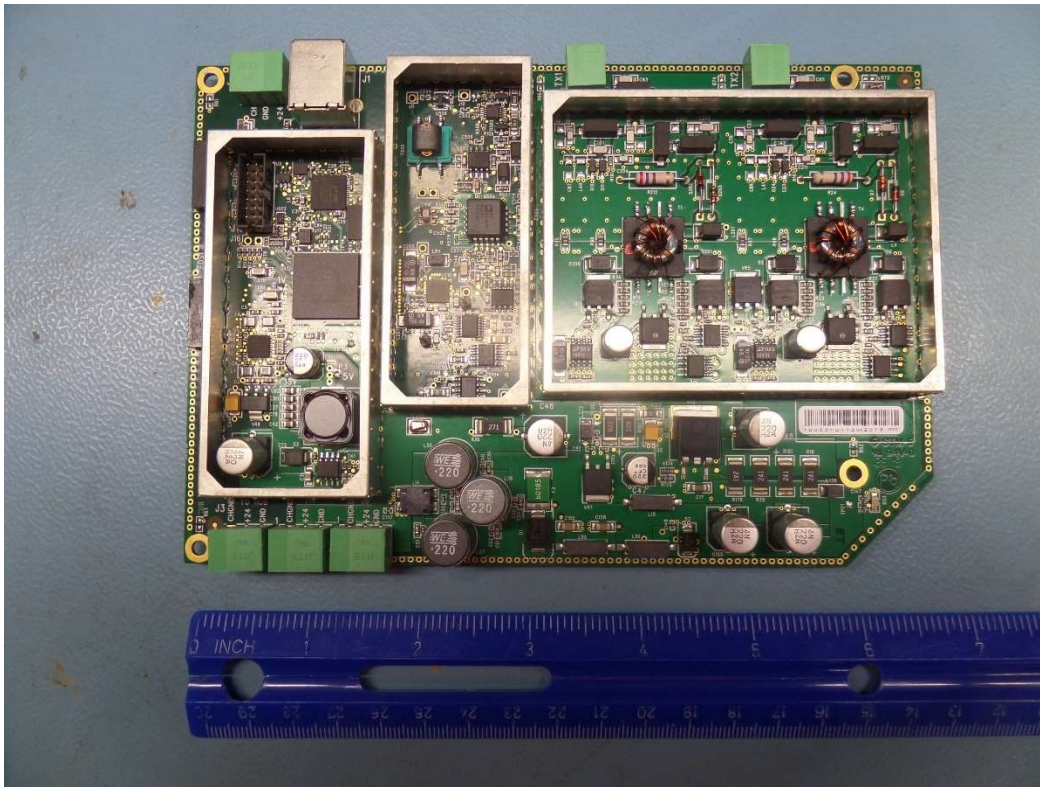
Neo Remote Electronics Enclosure TR4300 EAS RF board top side without shields
